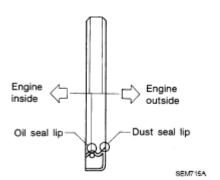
Applying Engine Oil To Both Oil Seal Lip And Dust Seal Lip
